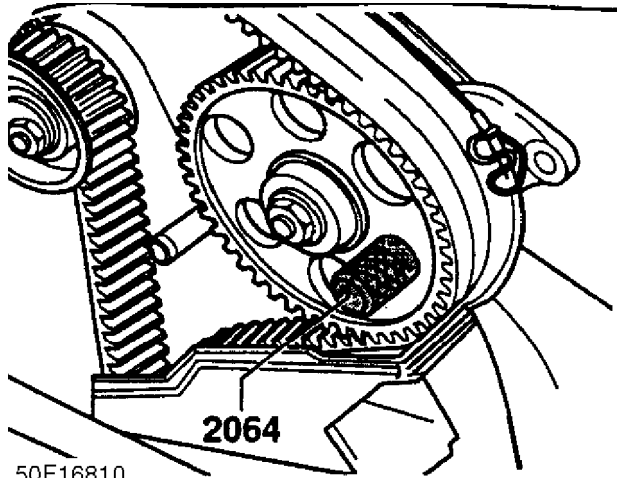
Locking Injection Pump Sprocket (Lock Pin 2064)
